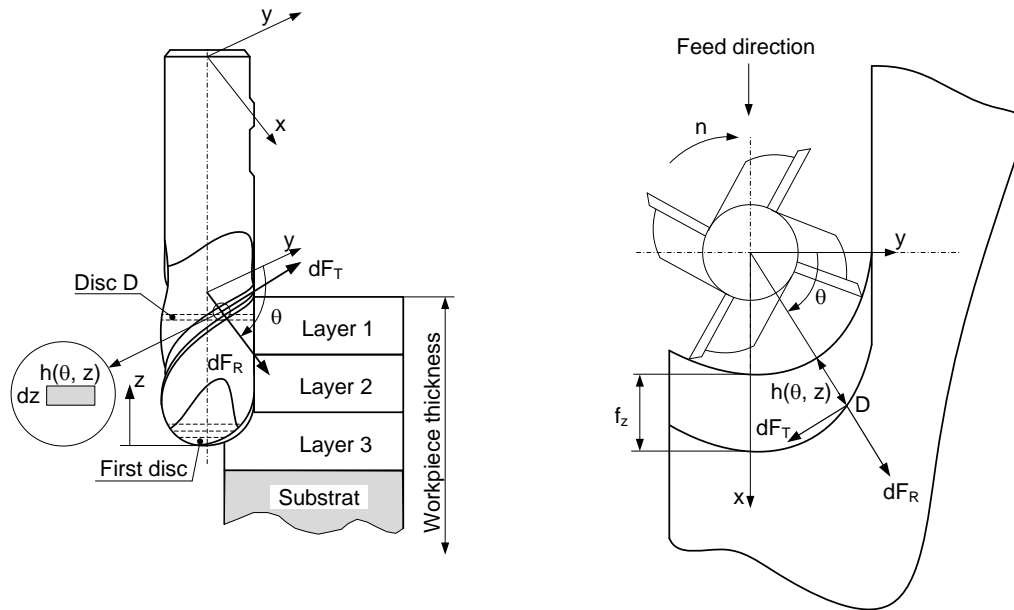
Ball-end mill with  $D$  cutting disc load and chip cross-section in horizontal milling of layered material.
